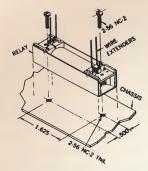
Back-of-Panel mounting. Use of two diagonally opposed holes is recommended. The wire extenders can be furnished on special order.
